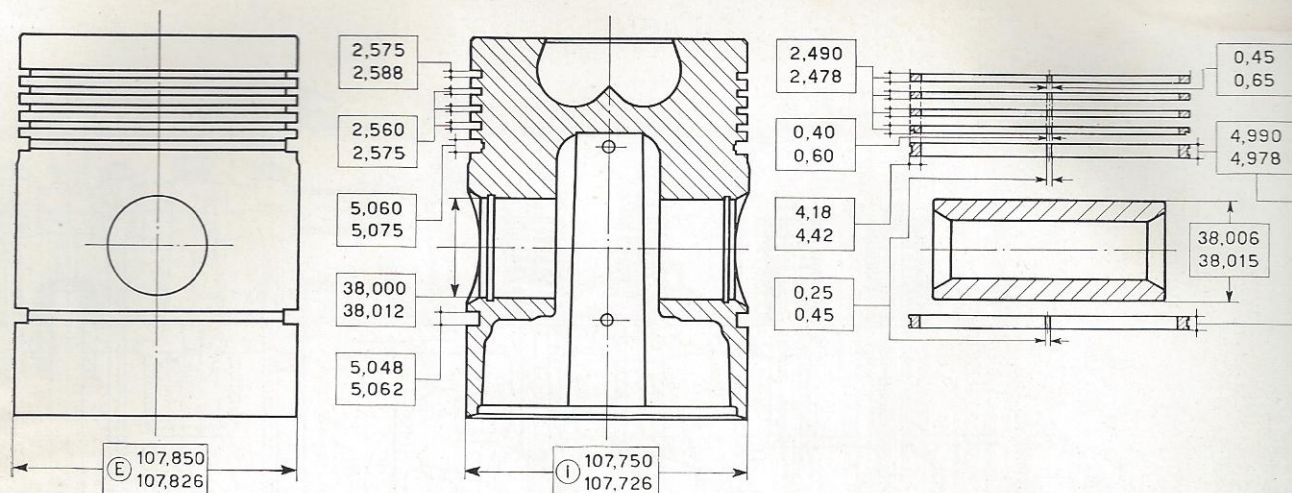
/6. - Dimensions of standard pistons, rings and pins (engine mod. C02D/60 Var. 10).
